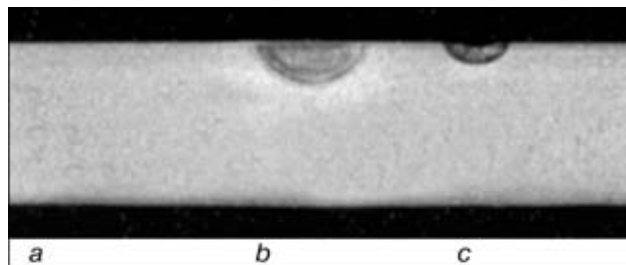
Macrosection of a sample of aluminium alloy AMg3 3.0 mm thick with penetration by microplasma (*a*), hybrid (*b*) and laser (*c*) welding (welding speed 0.25 m/min) using the alternating-polarity arc (current amplitude 25 A, frequency 125 Hz, plasma gas (Ar) flow rate 0.5 l/min) and YAG laser (radiation power 1.2 kW, focal spot size 0.6 mm)
